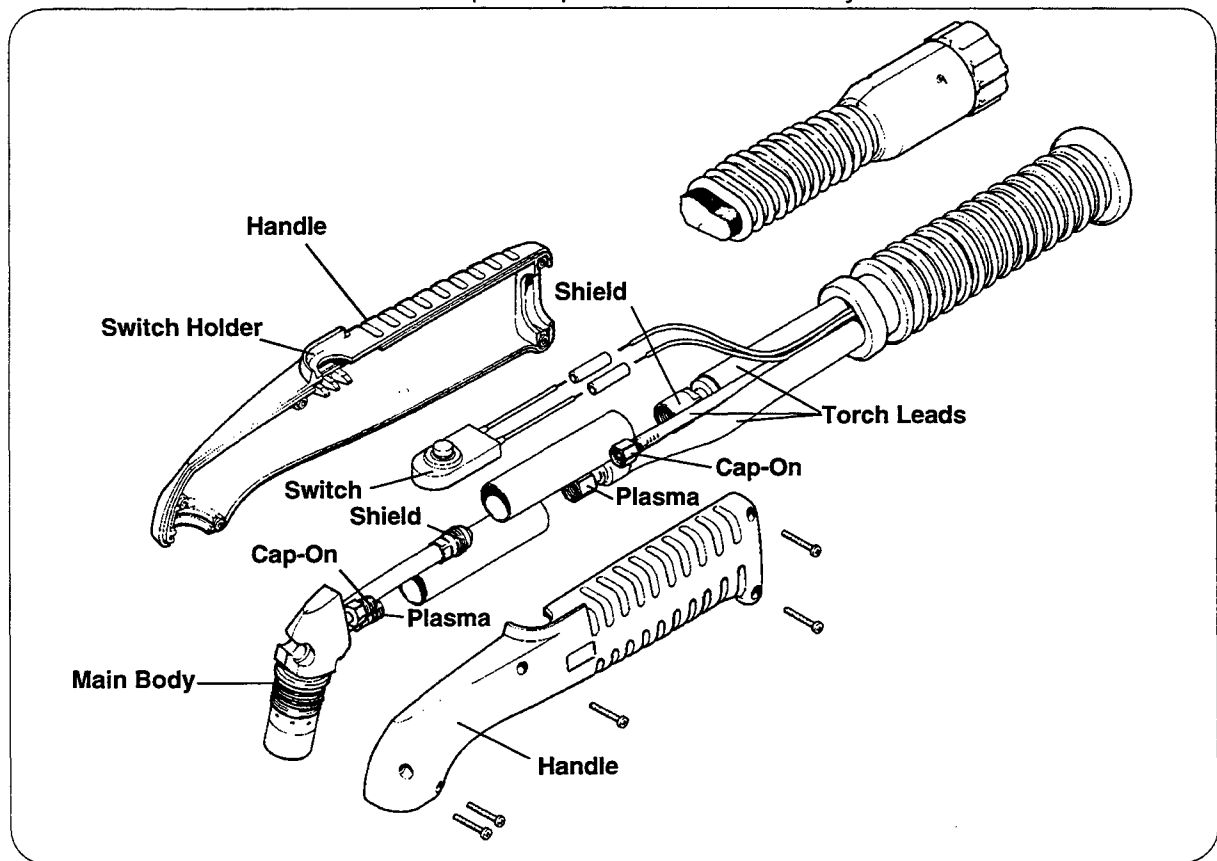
PAC160 or PAC160E Hand Torch Assembly
